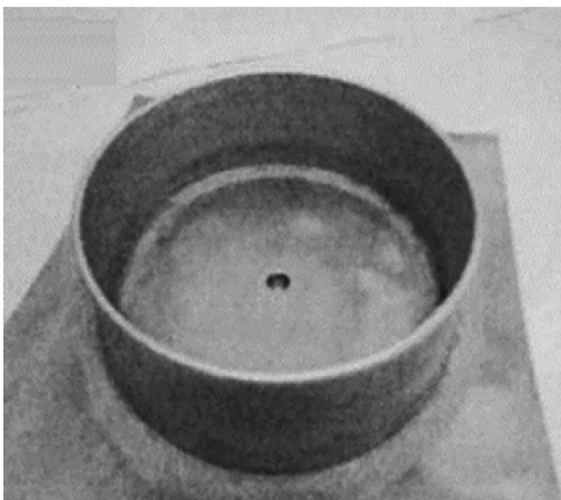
A cylindrical 4043 Al-alloy parts (120-layer) [320]
